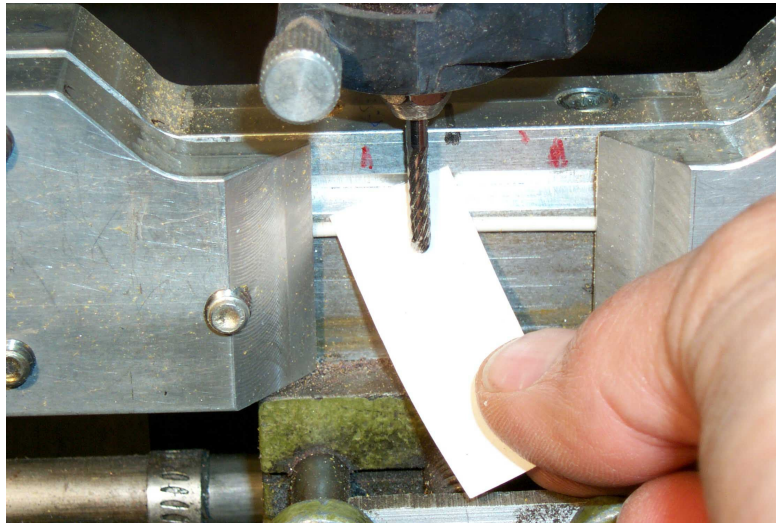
, Wire-to-Bit Spacing Adjustment using small Piece of Paper.
